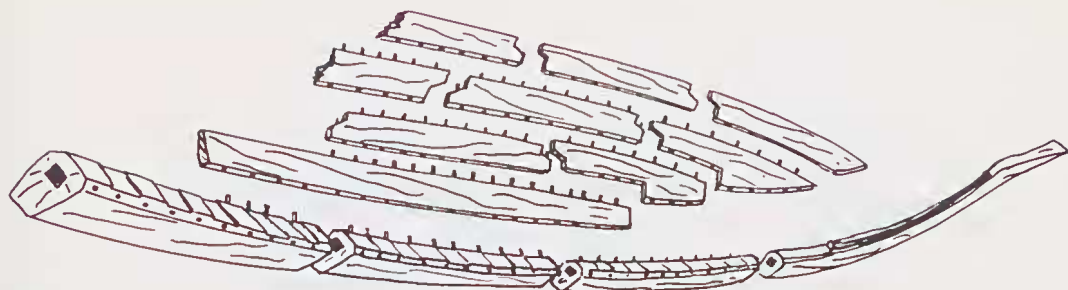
Keel and planking assembly; the edge dowelled planks lock the keel assembly together.
